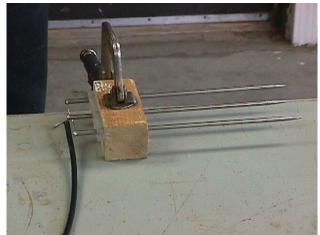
The center and outer rods have been pressed through the holes in the acrylic piece. The pigtail is not yet soldered to the wire connecting the outer rods.
